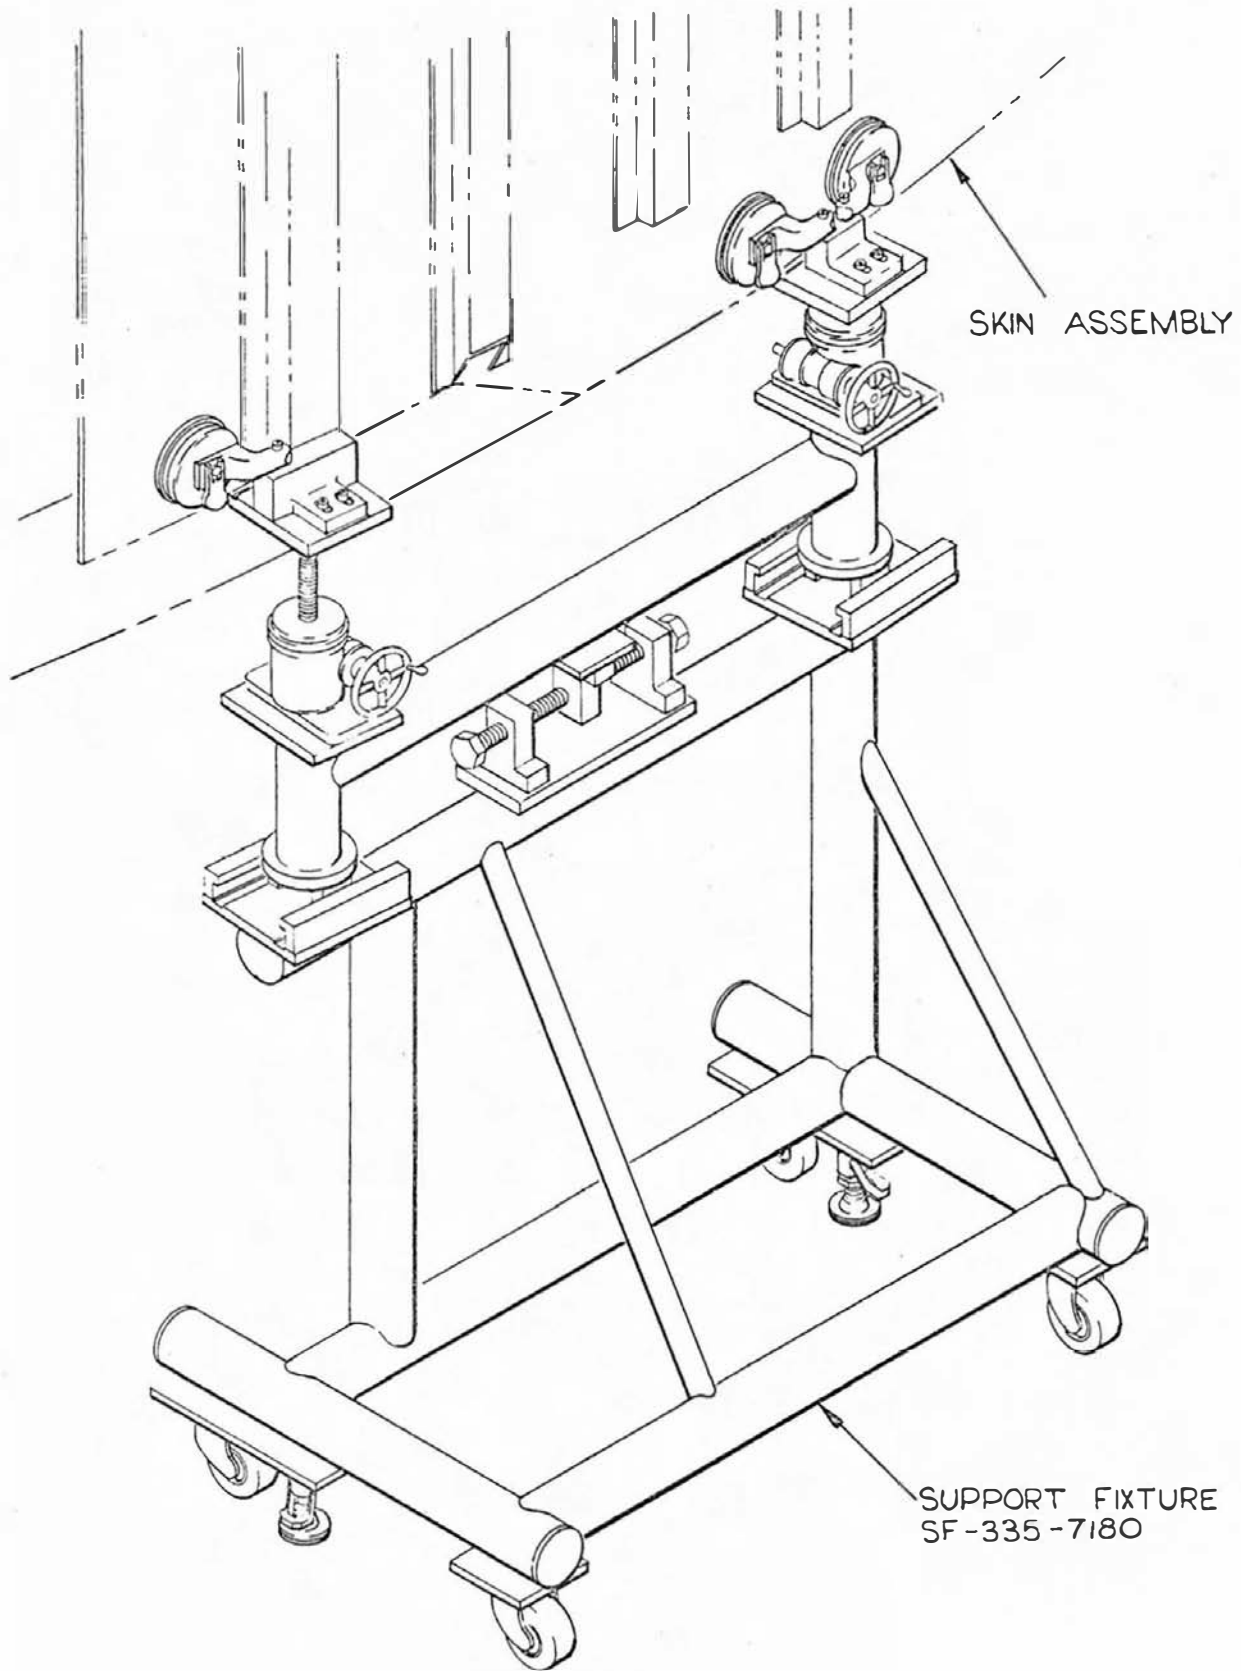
Skin Panel Assembly Support Fixture SF-335-7180
